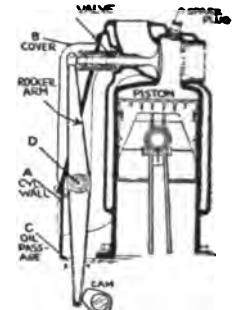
The Duesenberg principle of operating valves from the side. There are 2 inlet and 2 exhaust valves per cylinder.
